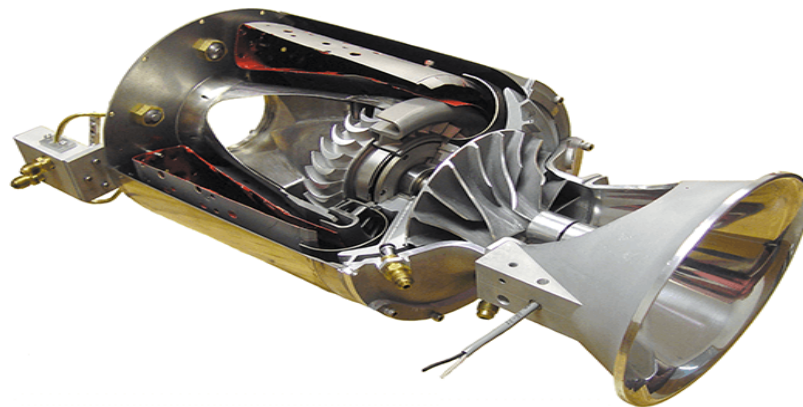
SR30 Turbojet Engine Cutaway Model
